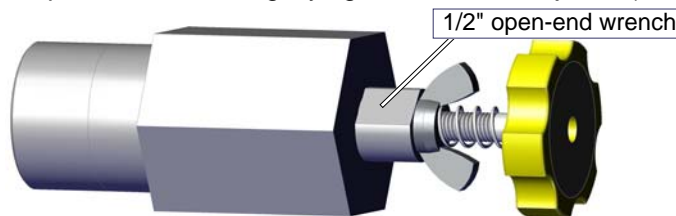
Torque the stem adjuster to the body assembly at approximately 20 ft-lb
